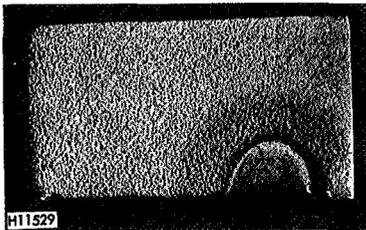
Porosity in Aluminum Weldment Caused by Lamination in Parent Material
